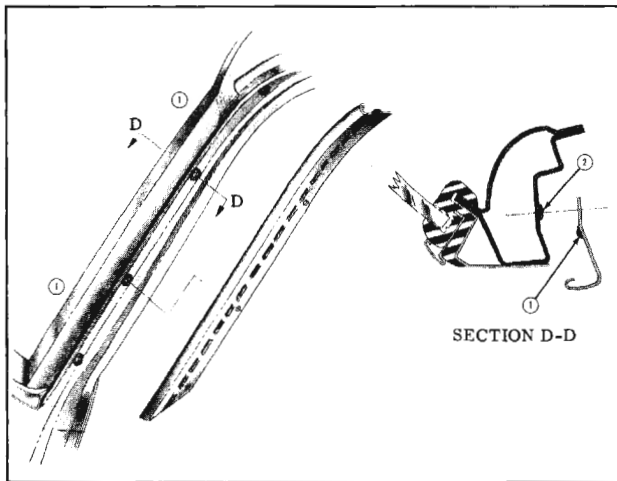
Windshield Pillar Drip Molding Sealing
